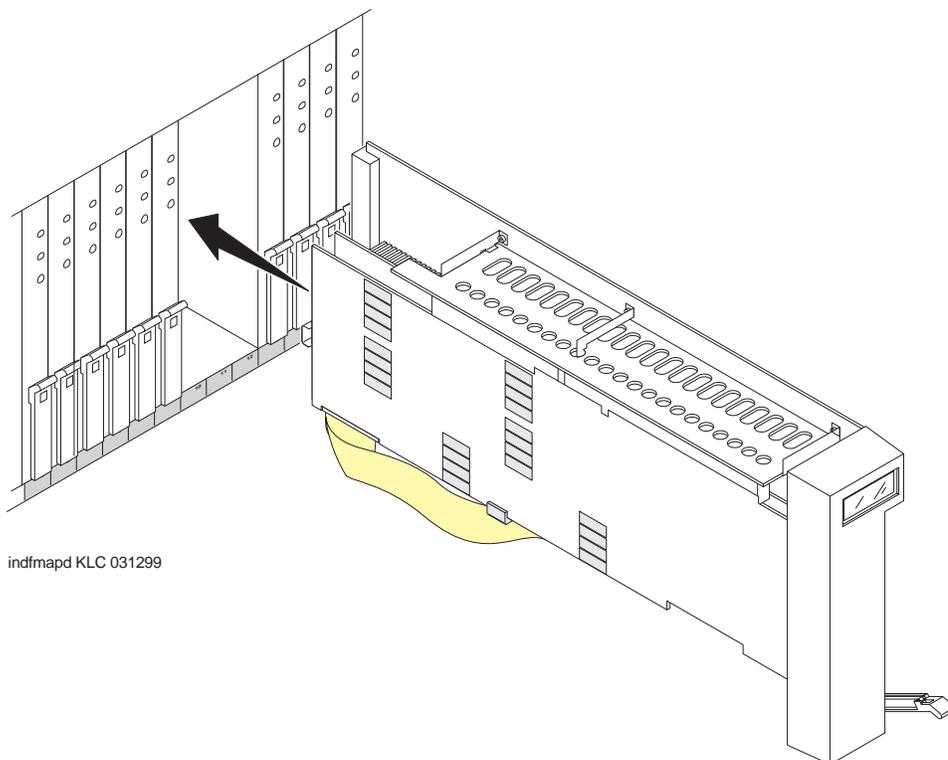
J58890MA-1 L30 IP Interface Assembly
